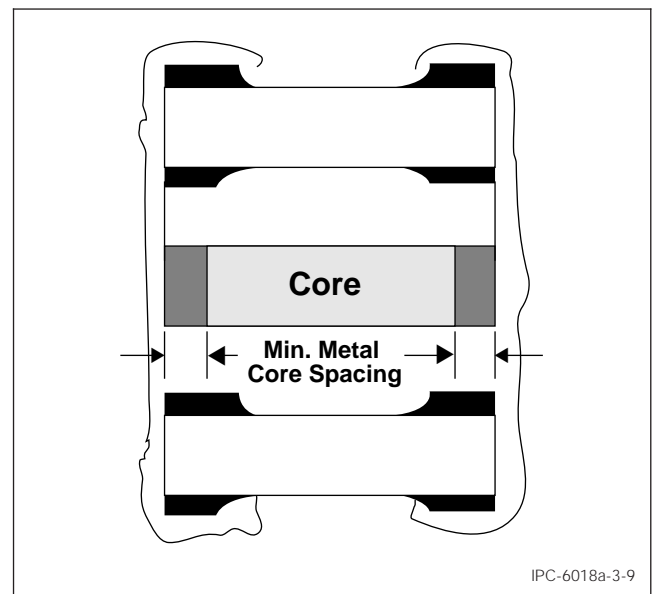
Metal Core to Plated-Through Hole Spacing
